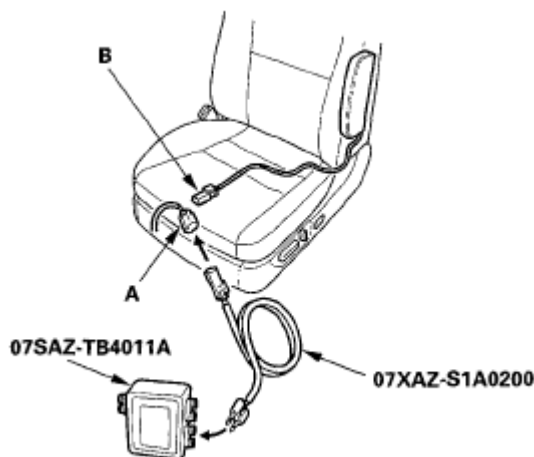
Disconnect Left Side Wire Harness 2P Connector And Driver's Side Airbag
